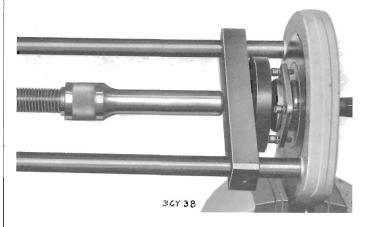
Pressing the inner axle shaft through the bearing and housing
